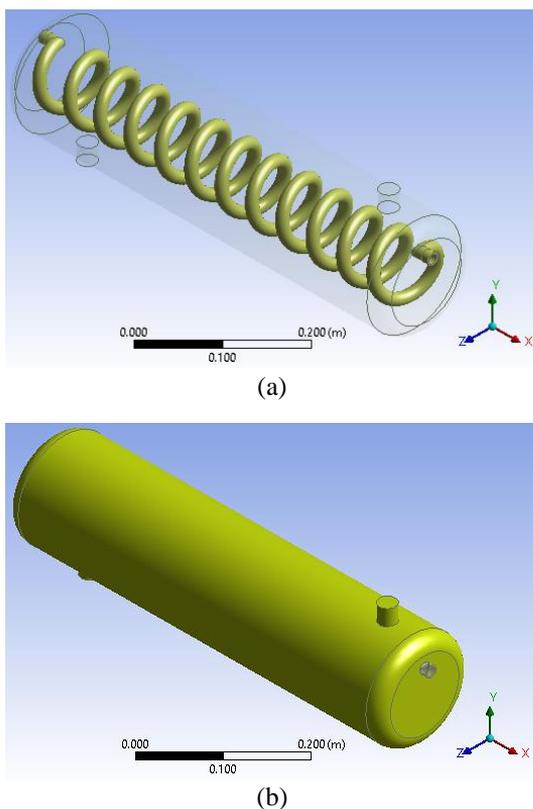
Traditional shell-and-tube of helical coils: (a) Helical copper tube, (b) Shell
